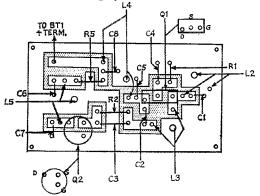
A-half-scale drawing of the etched-circuit board showing placements of the parts. All coils are mounted under the board (copper side and inside the Minibox) as are C₁, C₅, C₆, and C:. See text for location of S₁, J₁, J₂, and B₁. All other components mount on phenolic side of the circuit board as shown in the photo.
